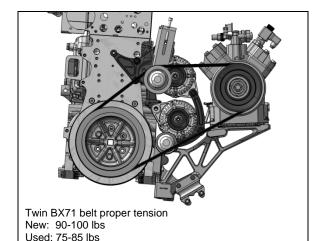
STANDARD BELT LAYOUT WITH CENTRAL HVAC SYSTEM
